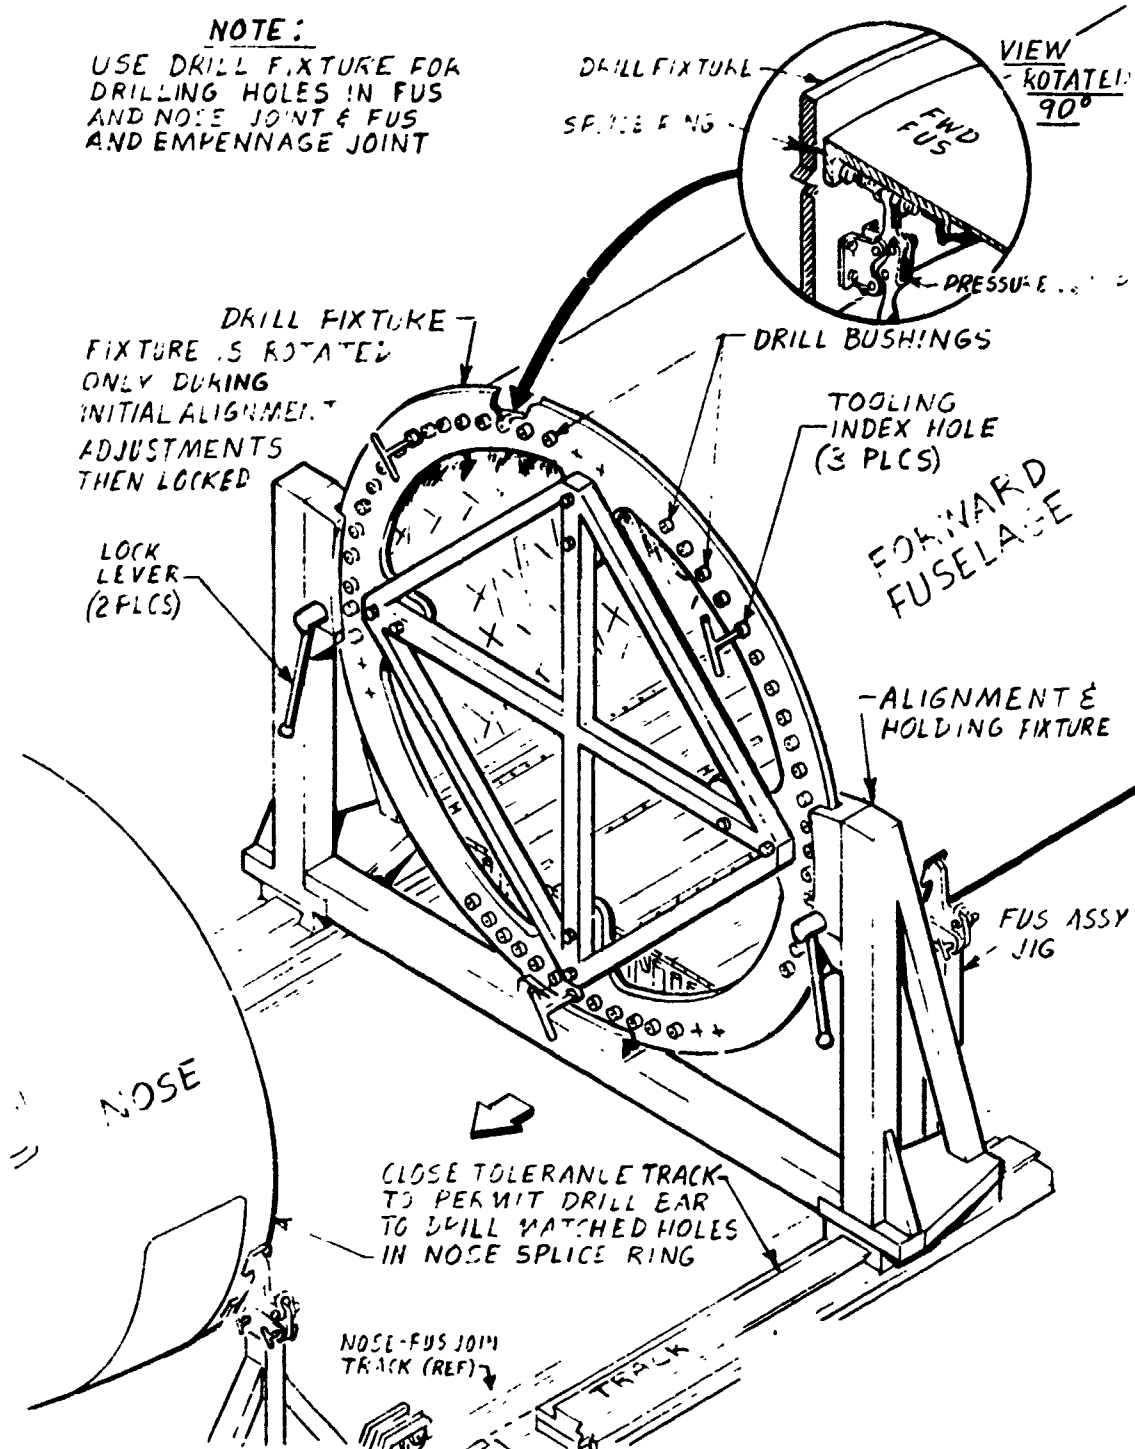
FUSELAGE JOINT ASSEMBLY
